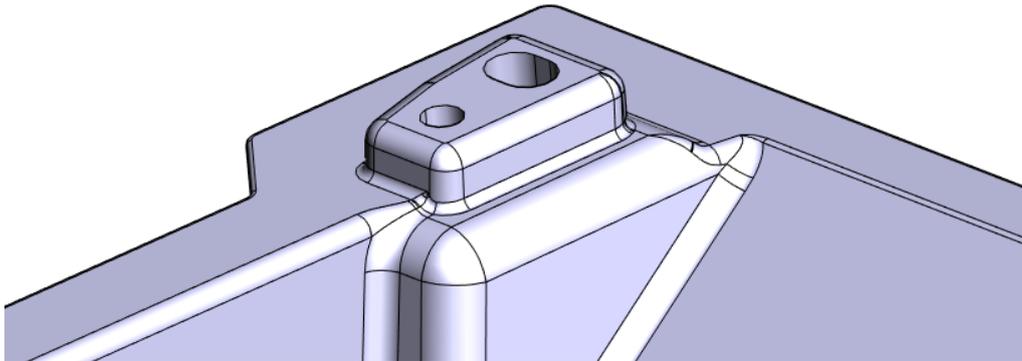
Left seat support attachment point. The large hole is the alignment hole for the seat attachment, and the small is an M10 thread.
